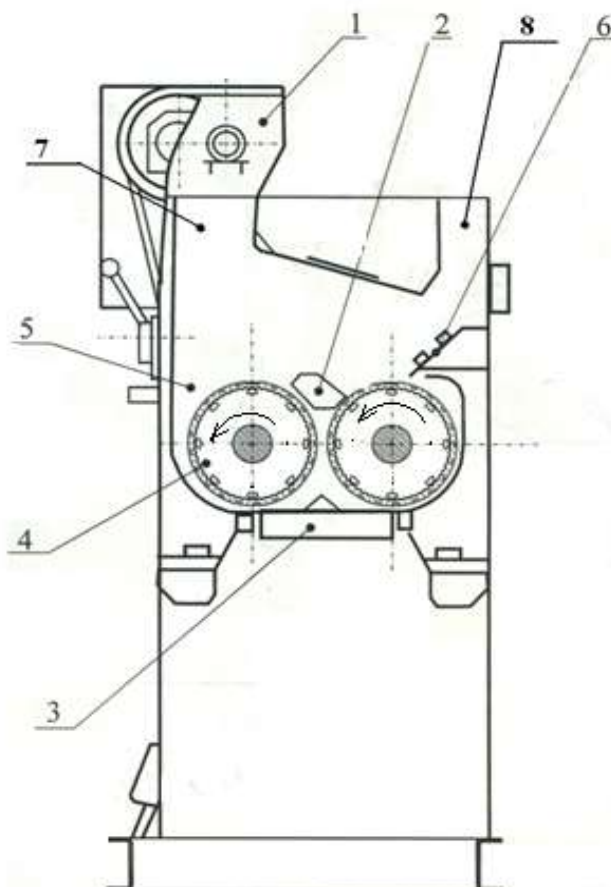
Assembled saw cylinder for 1LB colossal linter.
